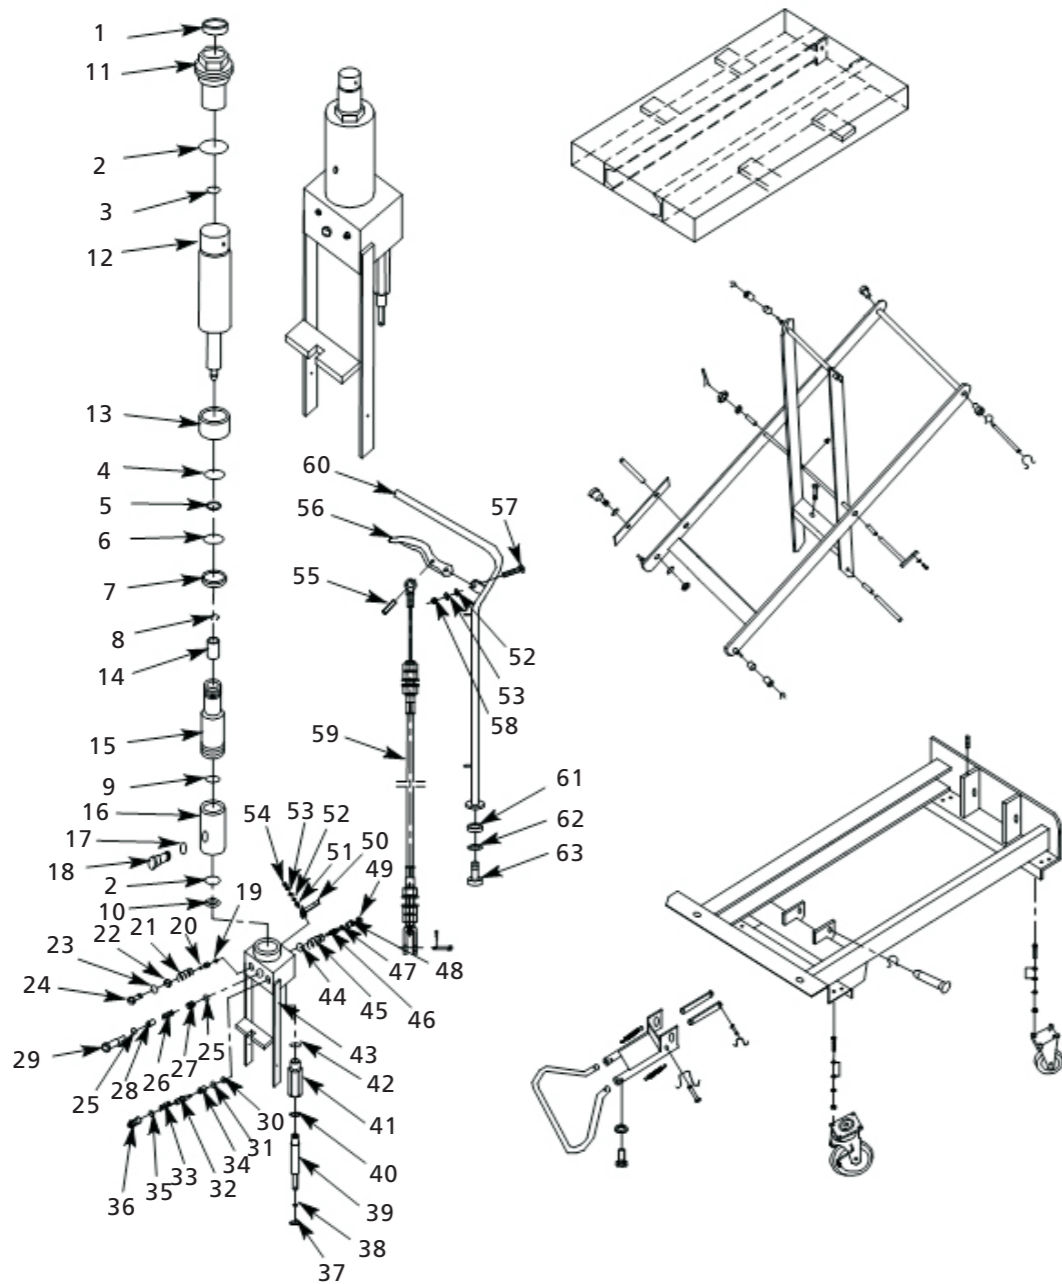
Repair Parts Illustration for Roller Transfer Scissor Carts (Model 33W286 and 33W287)
